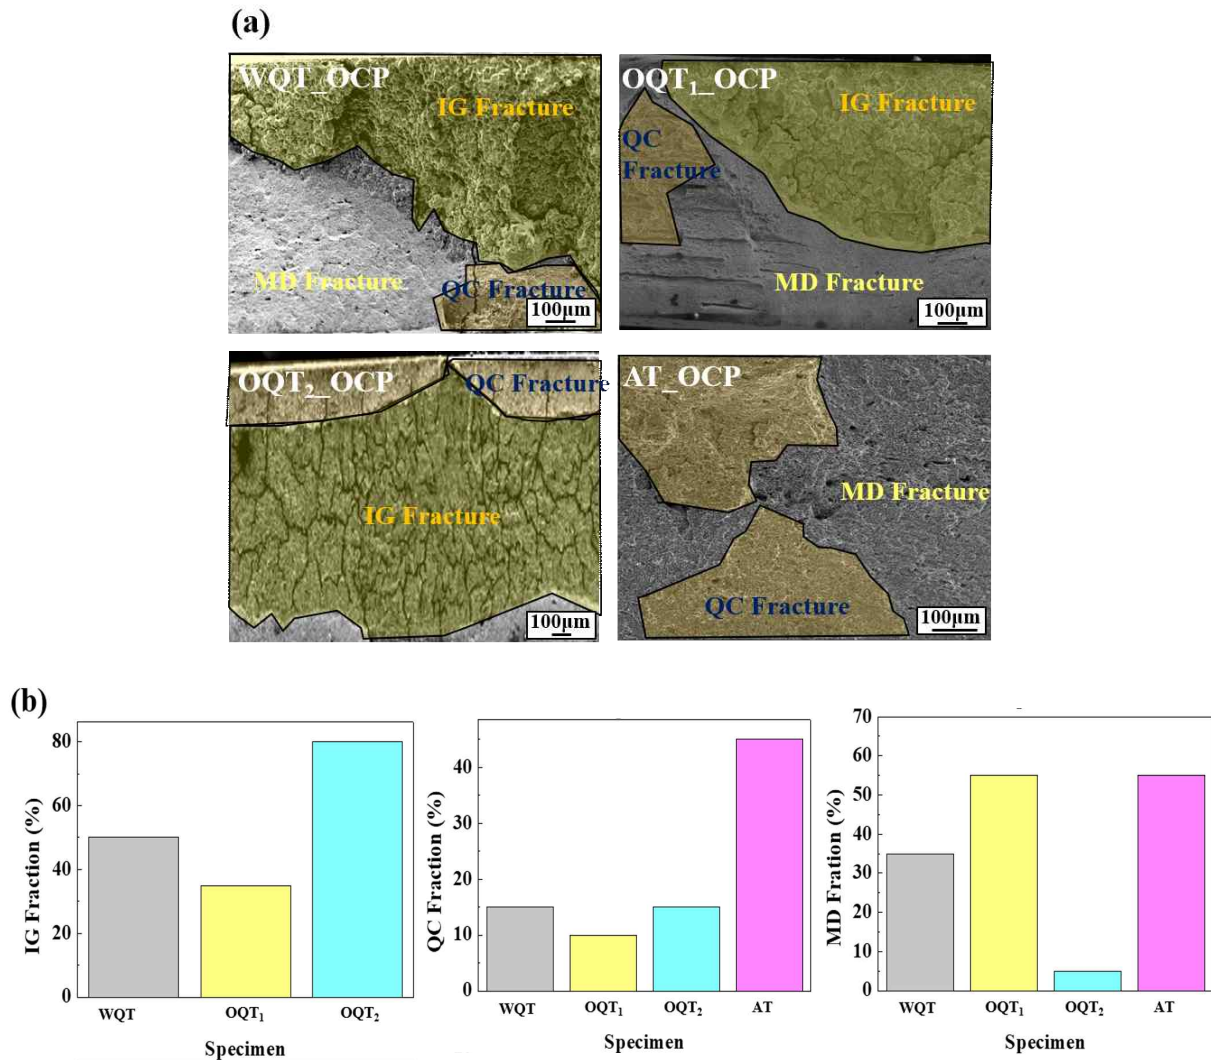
(a) Fracture surfaces of the four tested samples after SSRT, evaluated in a Walpole solution, and (b) fraction of IG, QC, and MD patterns in the fracture surfaces.
